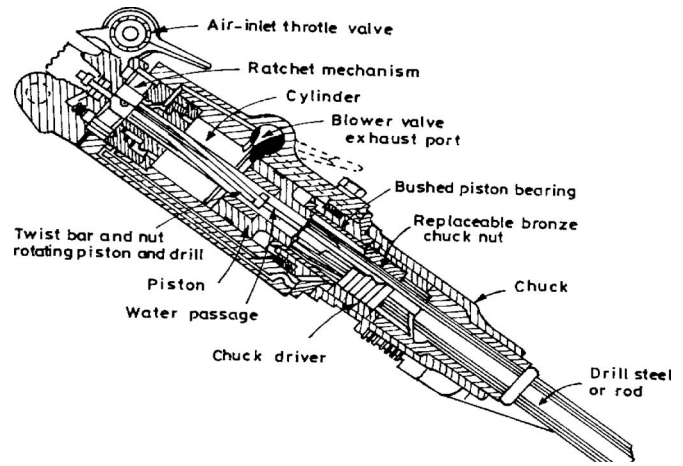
Sketch showing the constructional features of jackhammer drill machine.
